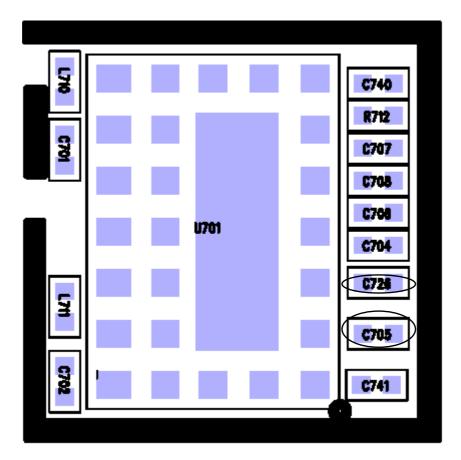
PAM TXEN and PCSSEL Test Point on the PCB Layout
